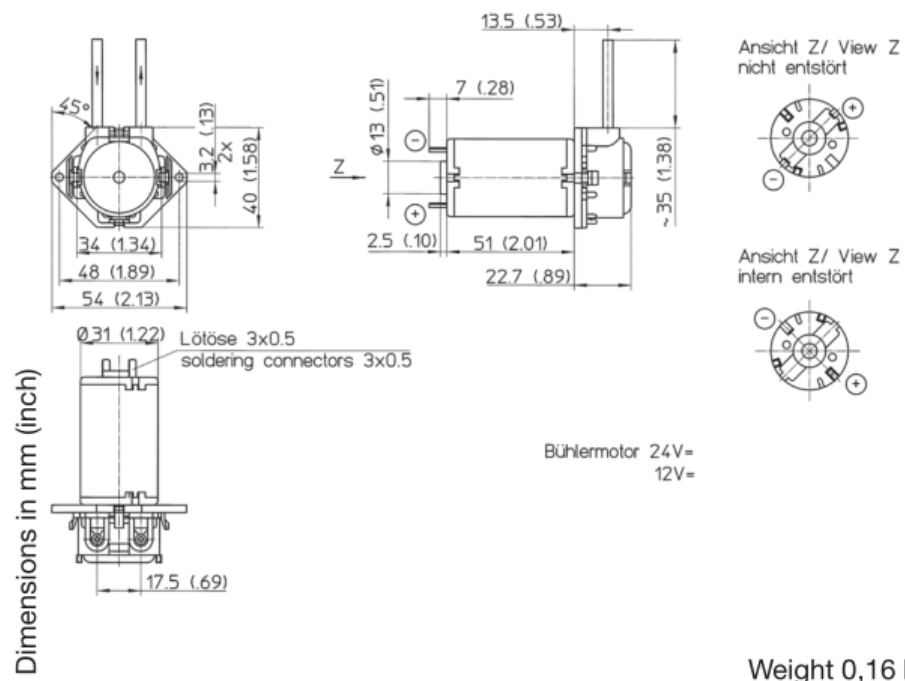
Multiview Schematic Drawing of SR10/30 DC Straight Flange Pump
